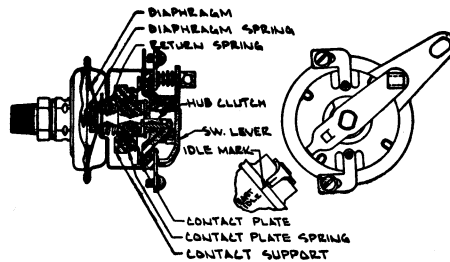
A typical starting motor control vacuum switch. Switch is adjusted with engine idling so marks on pointer and housing align
